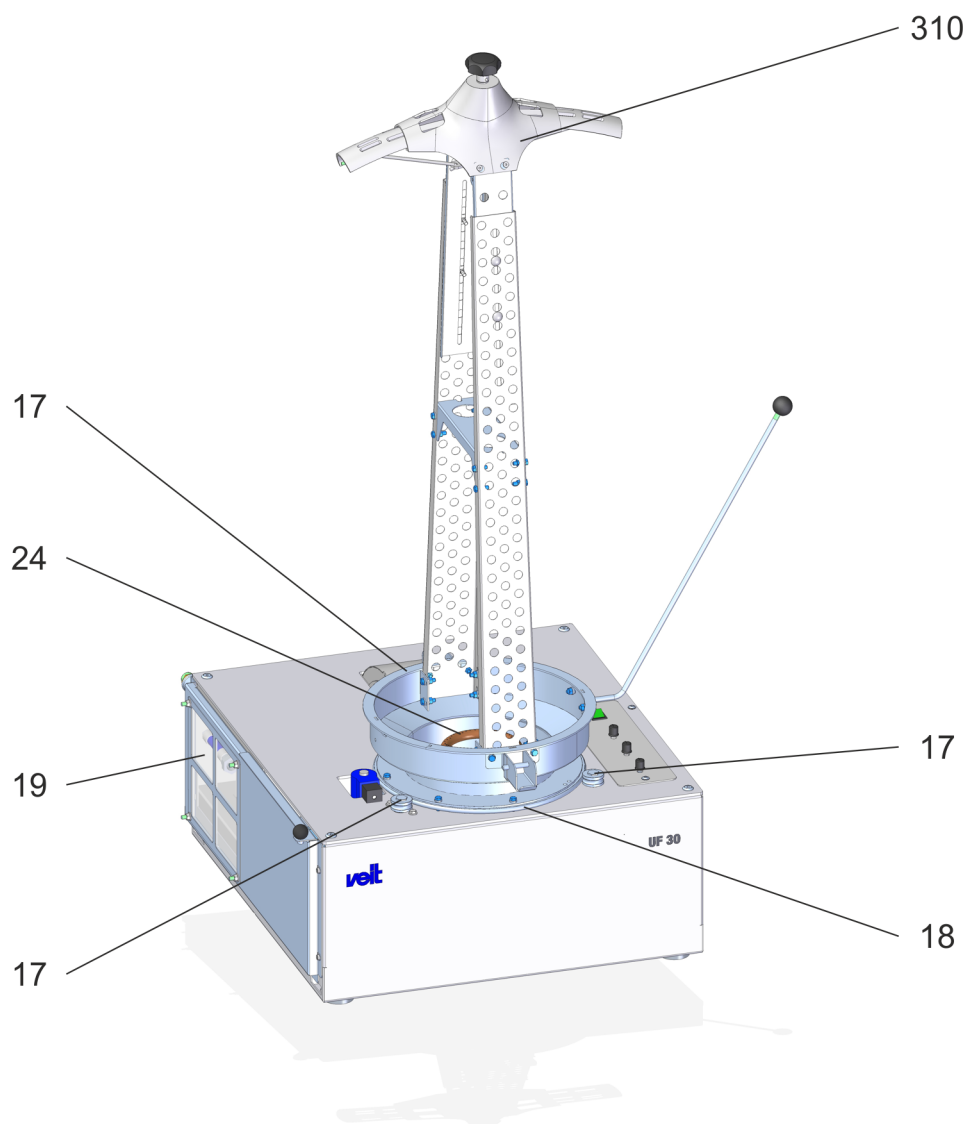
Spare parts for universal finisher Universal finisher with garment attachment
